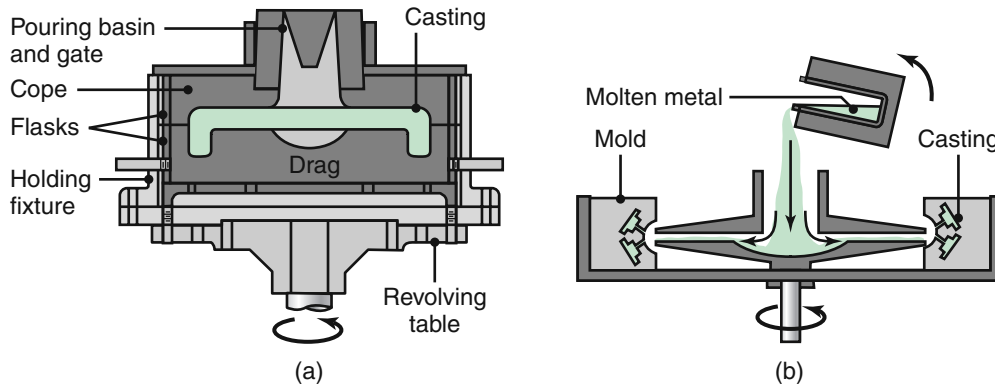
(a) Schematic illustration of the semicentrifugal casting process. Wheels with spokes can be cast by this process. (b) Schematic illustration of casting by centrifuging. The molds are placed at the periphery of the machine, and the molten metal is forced into the molds by centrifugal force.
